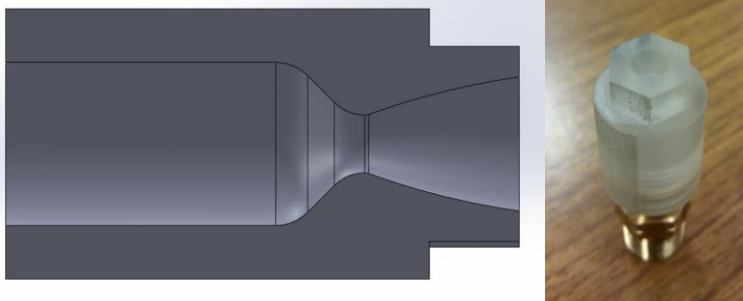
3D Printed nozzle SolidWorks® CAD drawing and single-stream test nozzle.
